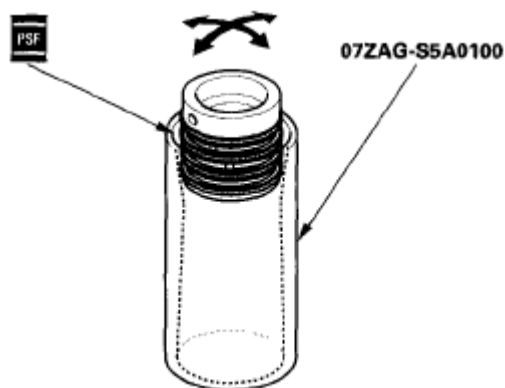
Identifying Area Applying Power Steering Fluid On Sleeve
